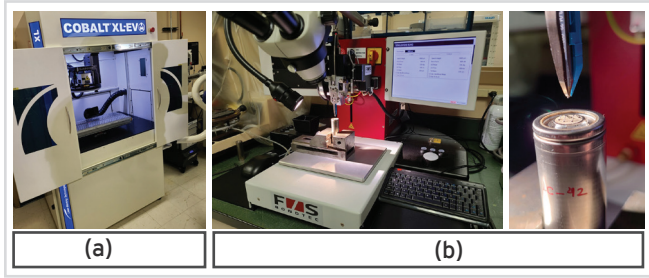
Experiment setup a) Cobalt-xl-ev-100PF laser making system; b) F&S BONDTEC wire bonder
